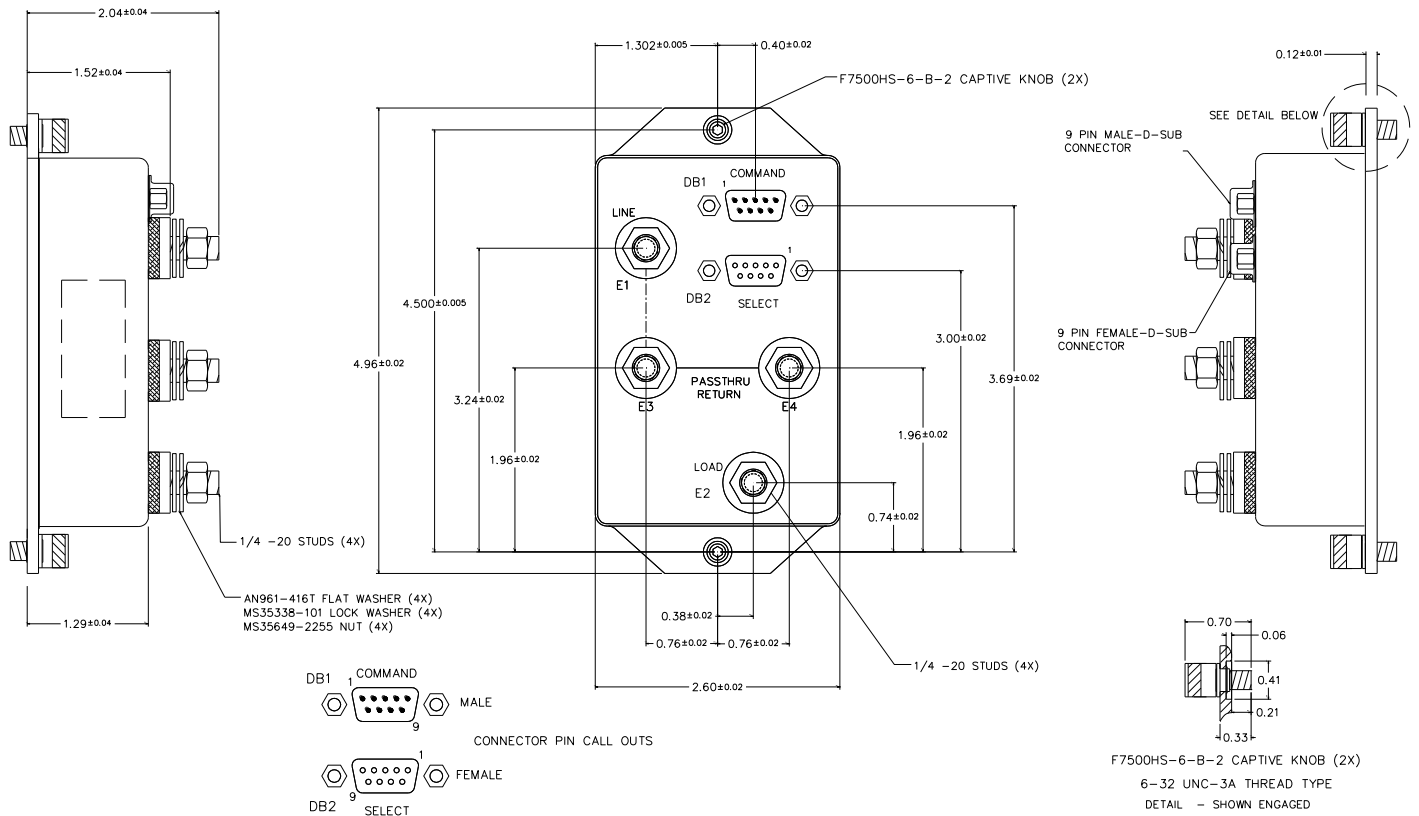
Mechanical Dimensions and Pin Assignments (All dimensions are in inches)
